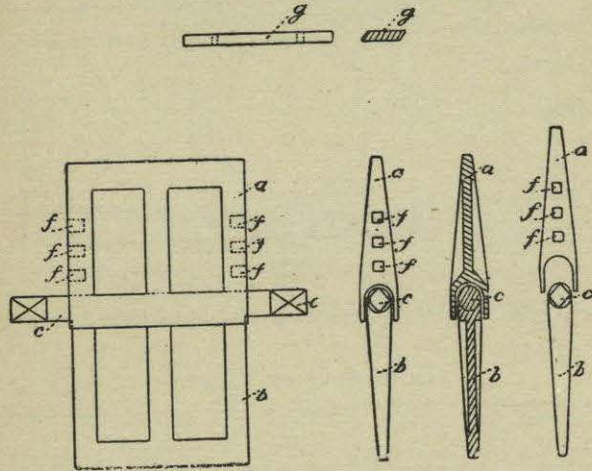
Details of Kirkham Valve—*f*, Holes for inserting bar to assist in removing flap, *a*, for repairs; *g*, removable valve seat which can be replaced when worn.
